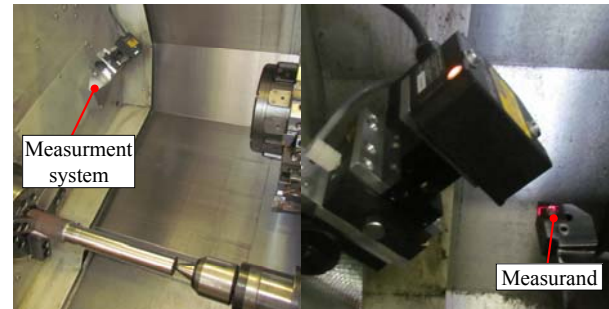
Measurement system mounted on Mori Seiki machine tool
